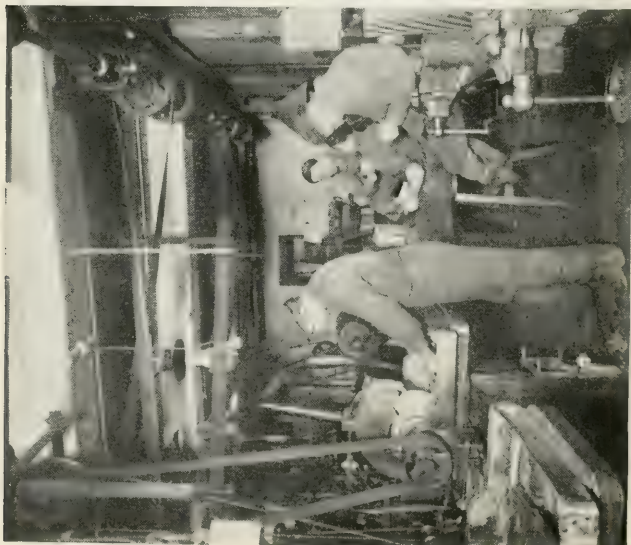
Plate XV: Grinding tools the old way wasted the time of the men and resulted in non uniform tools. The tool grinder and tool-keeper save time and make standardized cutting edges possible
